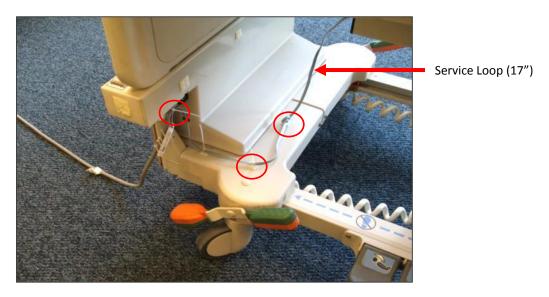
ALPS Cable Routing and Cable Tie Holder Placement
